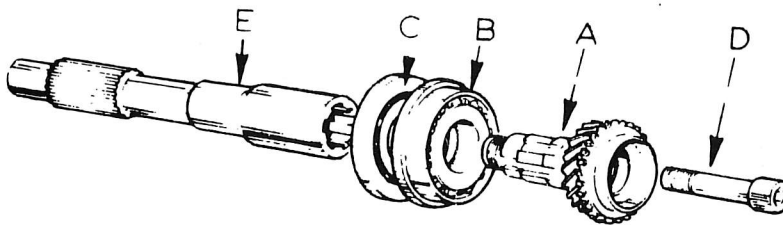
1st. MOTION SHAFT ASSEMBLY
